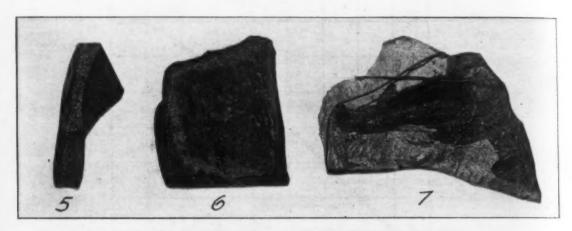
Shows The Original White Fracture Of Motor Bearing Housings And Commutator End Plates, Fig. 6—Shows A Malleablized "Black-Heart" Structure Of One Of These Parts, Fig. 7—Shows A White Fracture On One Of The Commutator End Plates Which Was Treated In The Same Charge As The Others, This Indicates That The Critical Temperature Of This Iron Had Not Been Reached During The Annealing Operation.
